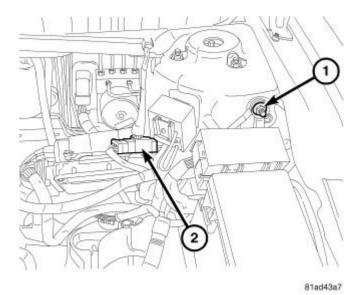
BATTERY CABLE Courtesy of CHRYSLER LLC
